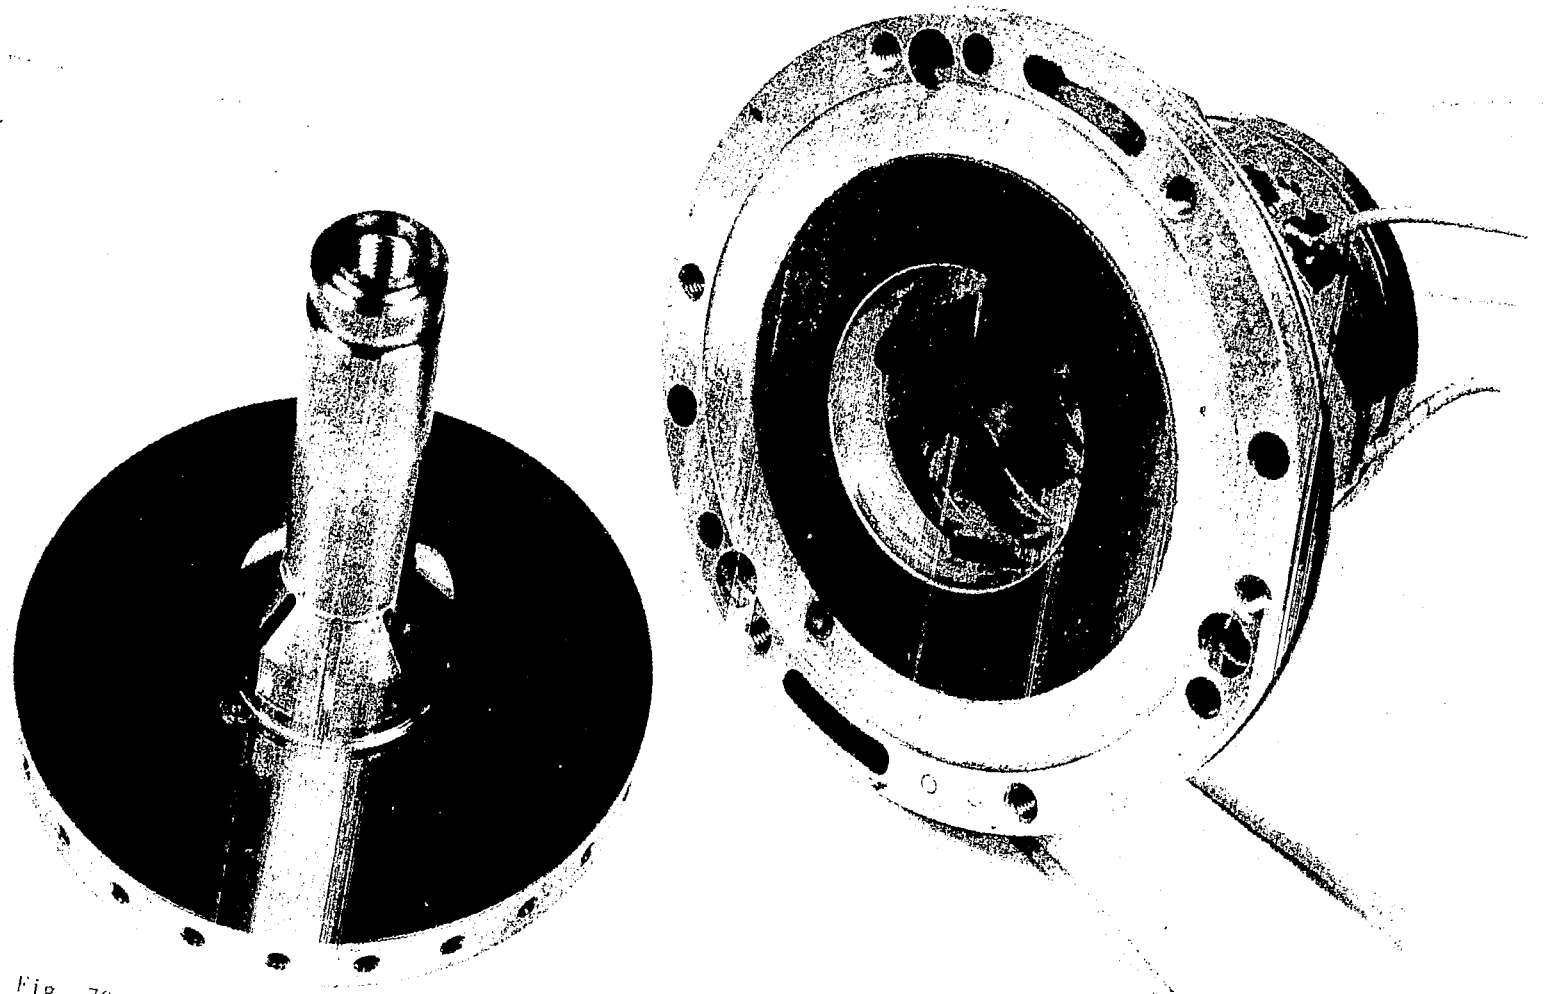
Reverse Thrust Plate and Runner, Inspection 1
